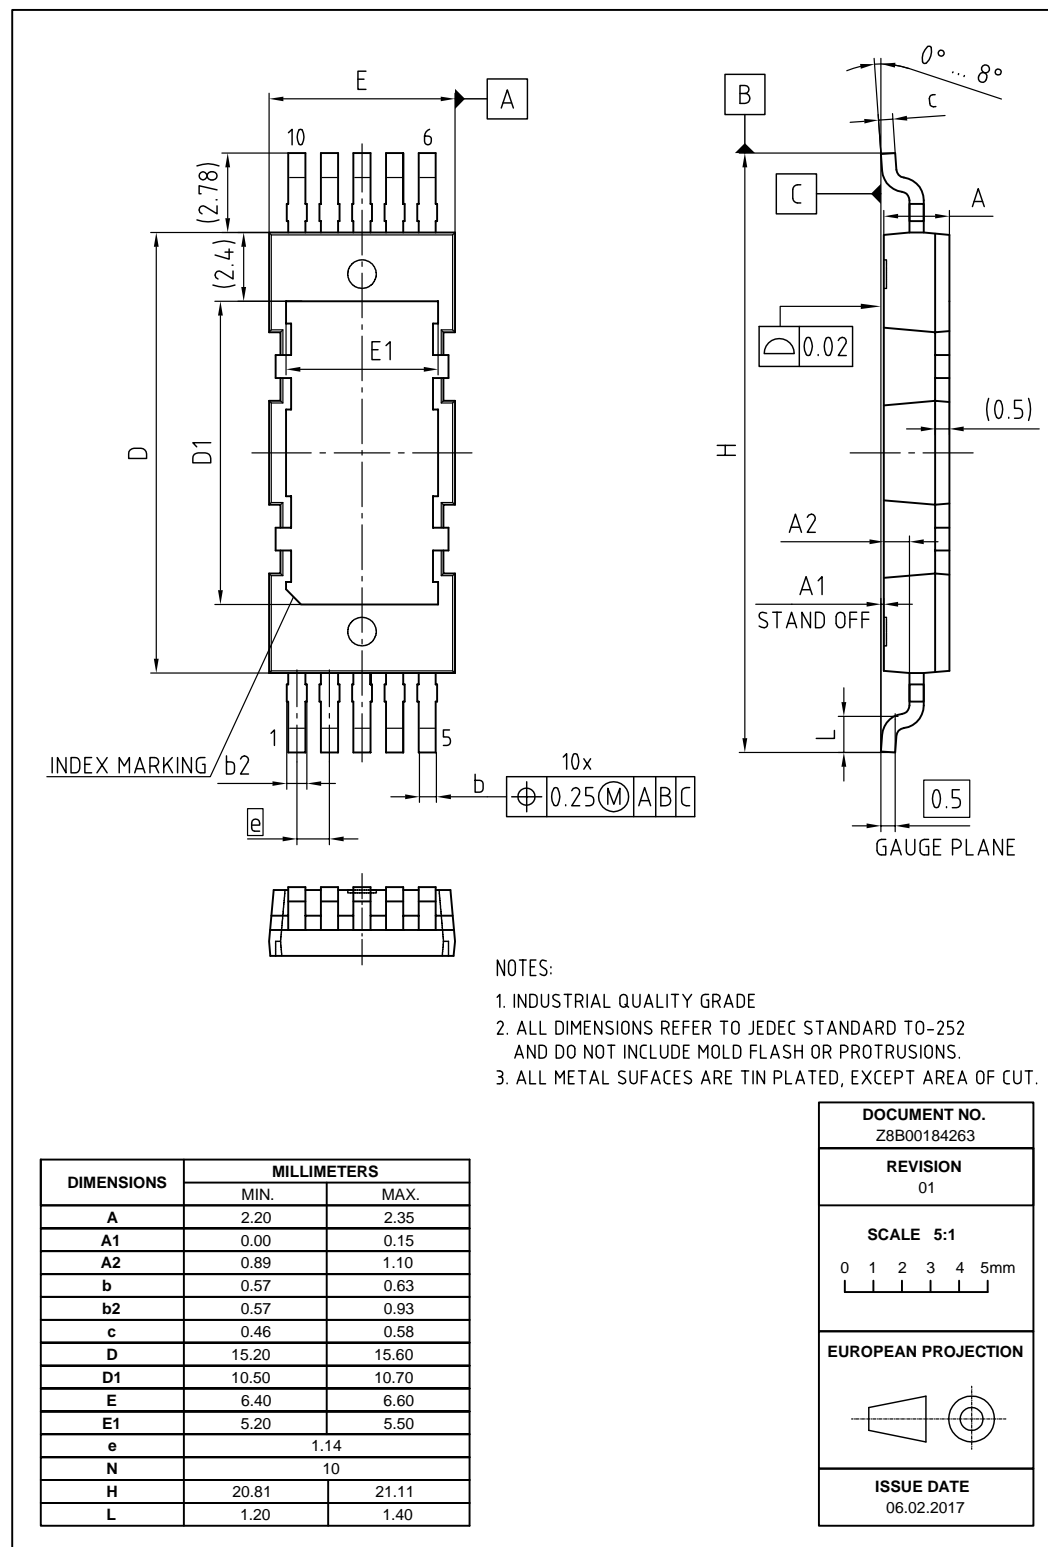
Outline PG-HDSOP-10, dimensions in mm/inches
